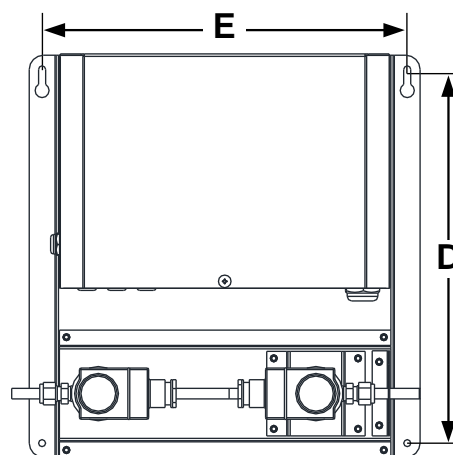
EZC Drilling Hole Dimensions (Back View)
